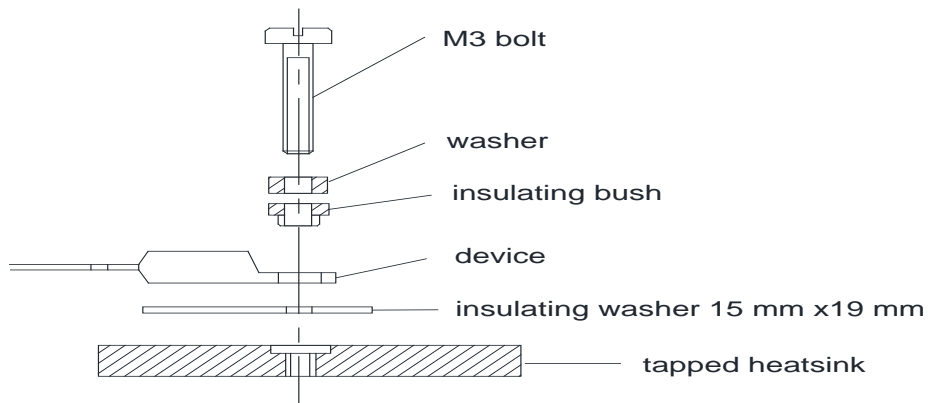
Insulated screw mounting with washer into tapped heatsink
